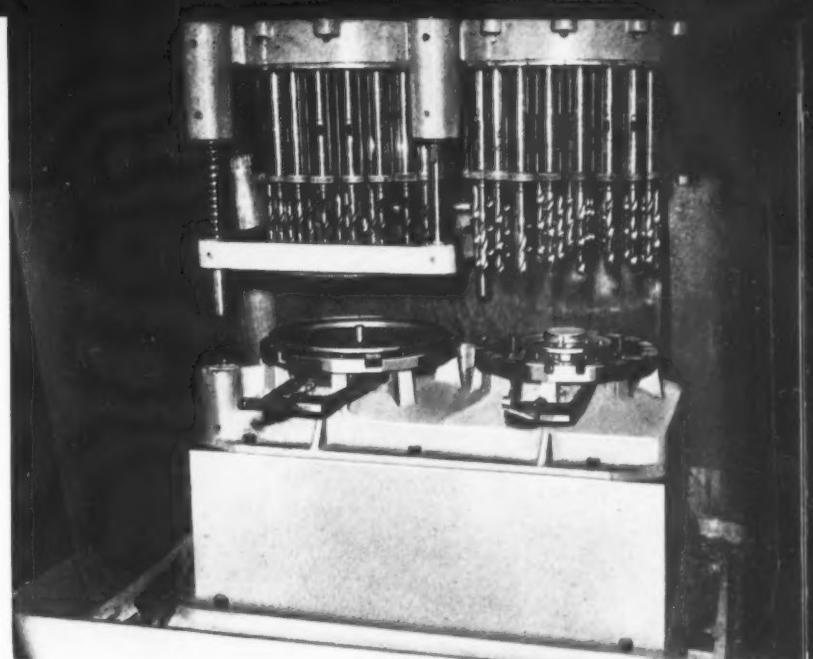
Forty-six Holes are Drilled and Countersunk around the Flange and Hub of Flywheel Covers in Four Operations on This Two-head Machine
